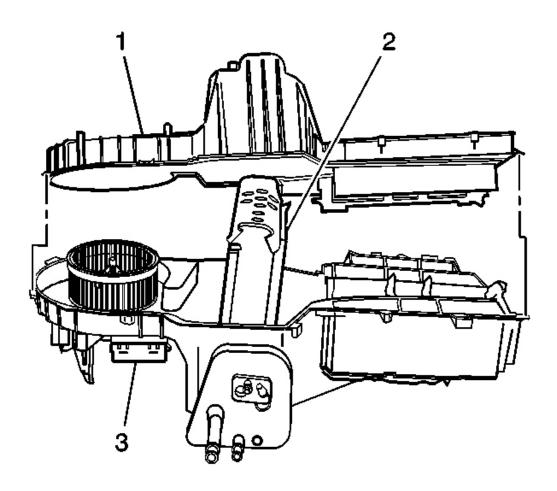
View Of HVAC Module Assembly Halves Courtesy of GENERAL MOTORS CORP.
